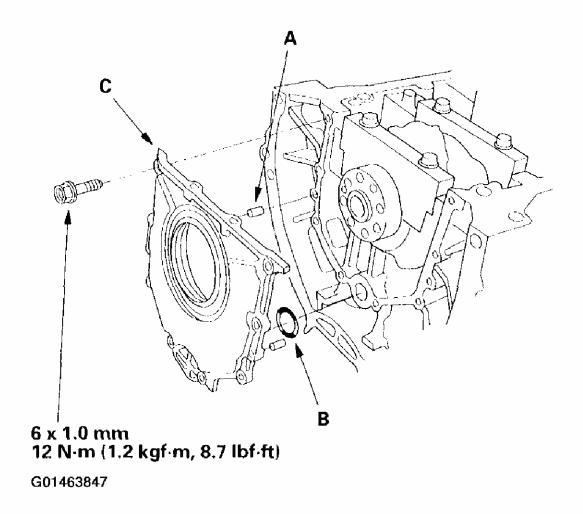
Installing The Dowel Pins, O-Ring & The Engine Block End Cover On The Cylinder Block
